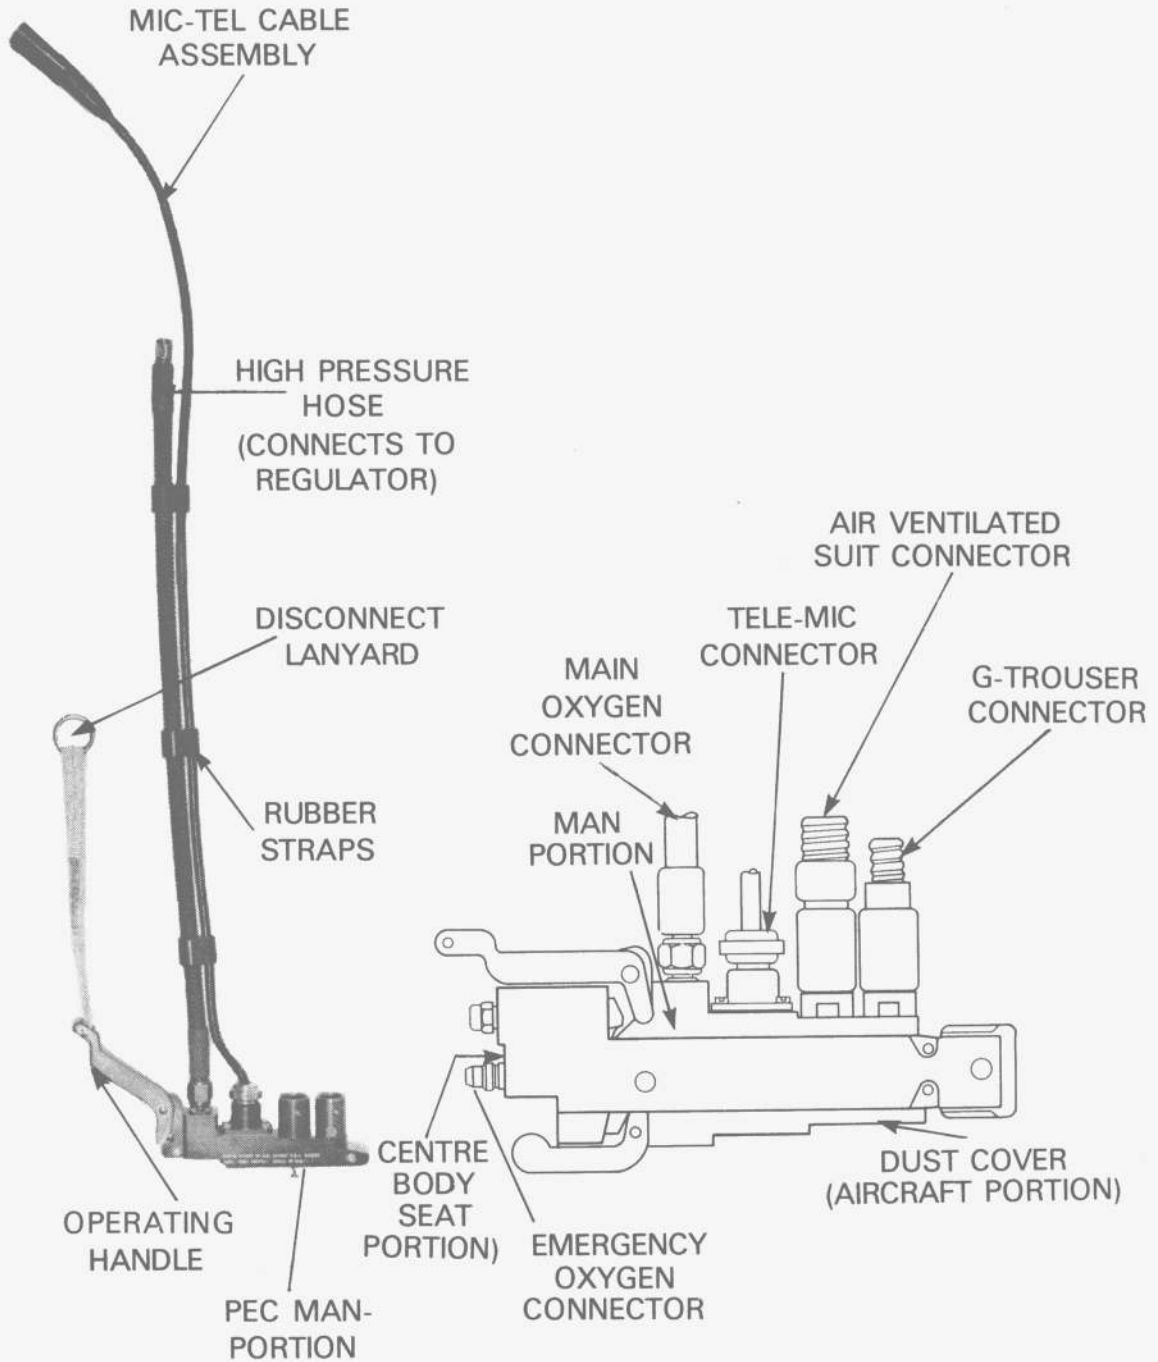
A Typical PEC and High Pressure Oxygen Mask Hose Assembly.
